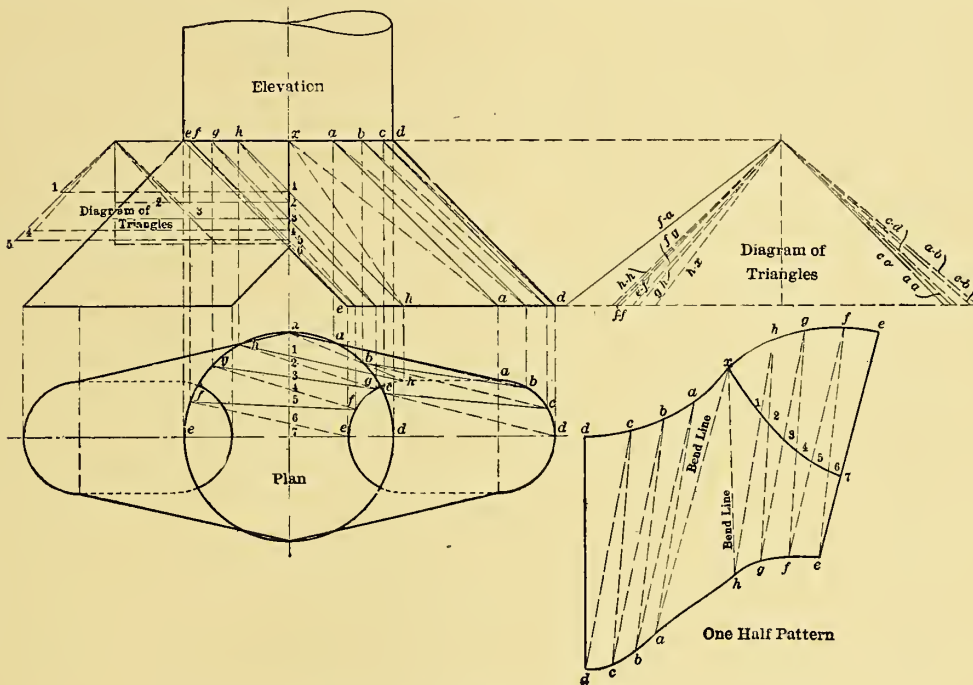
PLAN, ELEVATION AND PATTERN FOR AN ELLIPTICAL Y-PIPE CONNECTION.
